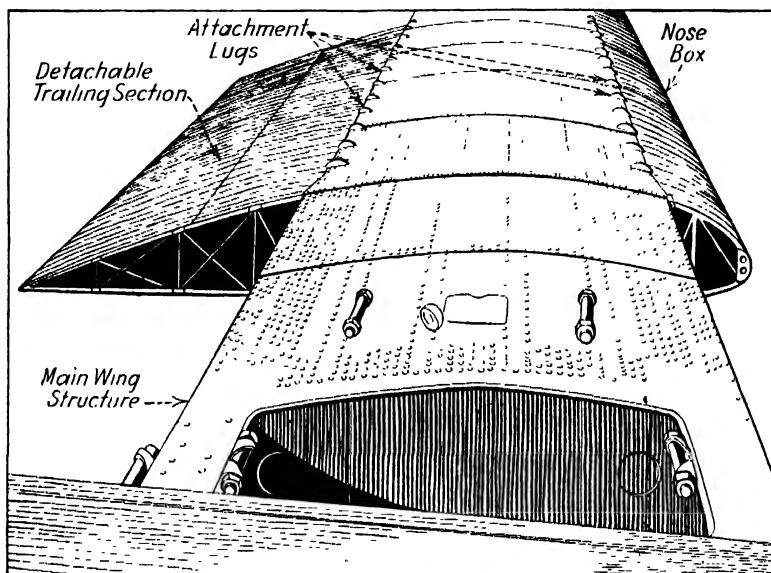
The Rohrbach Wing has Detachable Nose Box and Trailing Sections Fastened to Main Wing Structure. Duralumin is Used at All Points.
